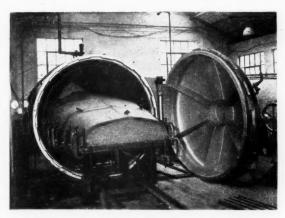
With rubber bag fitted, a hull on its mould enters the autoclave for hot moulding.
